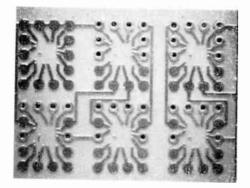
Detail photograph of front signal plane showing 20-mil pads for via-holes and 10-mil holes punched through selected pads. Each rectangular fan-out pattern interfaces directly to pads on one integrated-circuit chip.
